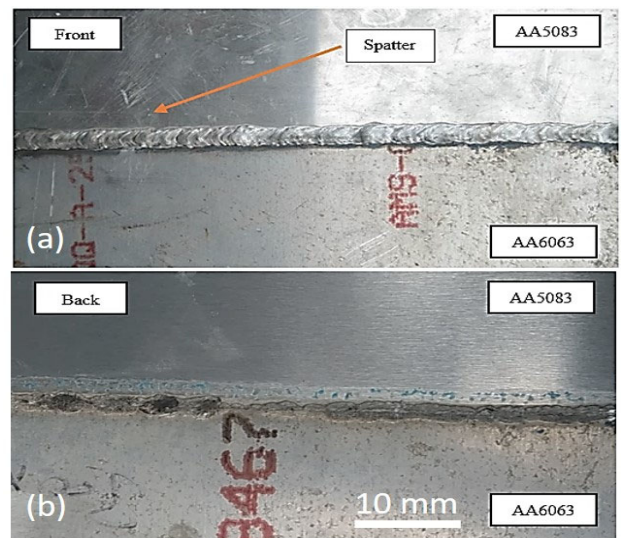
Bead appearance of dissimilar metals weld between AA5083 and AA6063 (a) welded face, (b) back face
